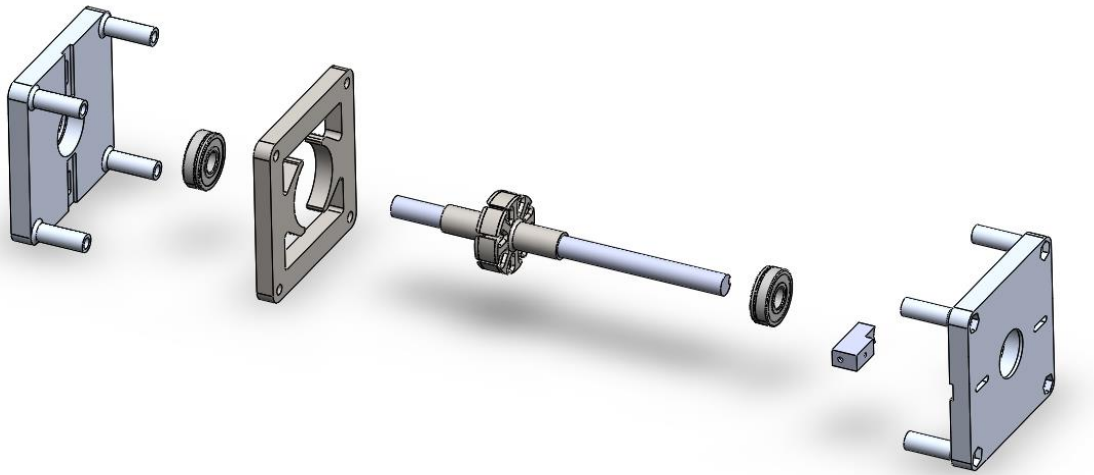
An exploded view of a brushed DC machine design that utilizes a 3D printed end plate.
